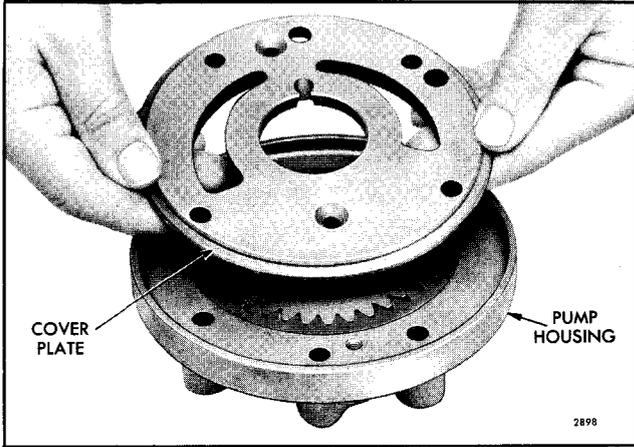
Installing Oil Pump Cover Plate on Oil Pump Housing
